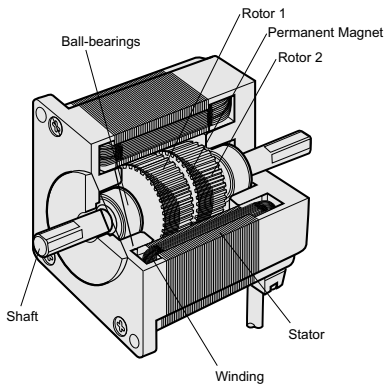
5 Phase Stepping Motor Cross-Section Parallel to Shaft
